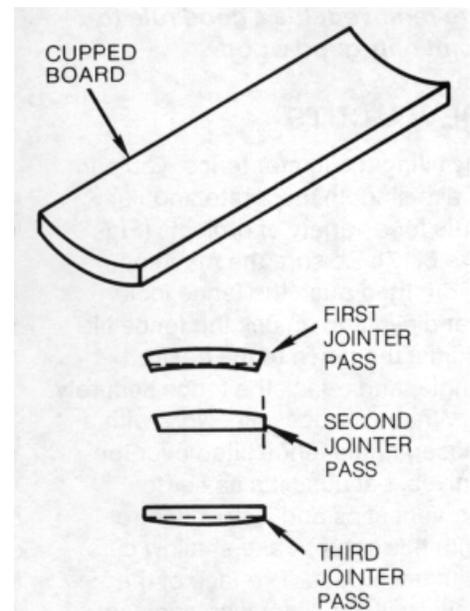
Cupped boards, if they are narrow enough and the cup is not extreme, can be jointed in this manner.
